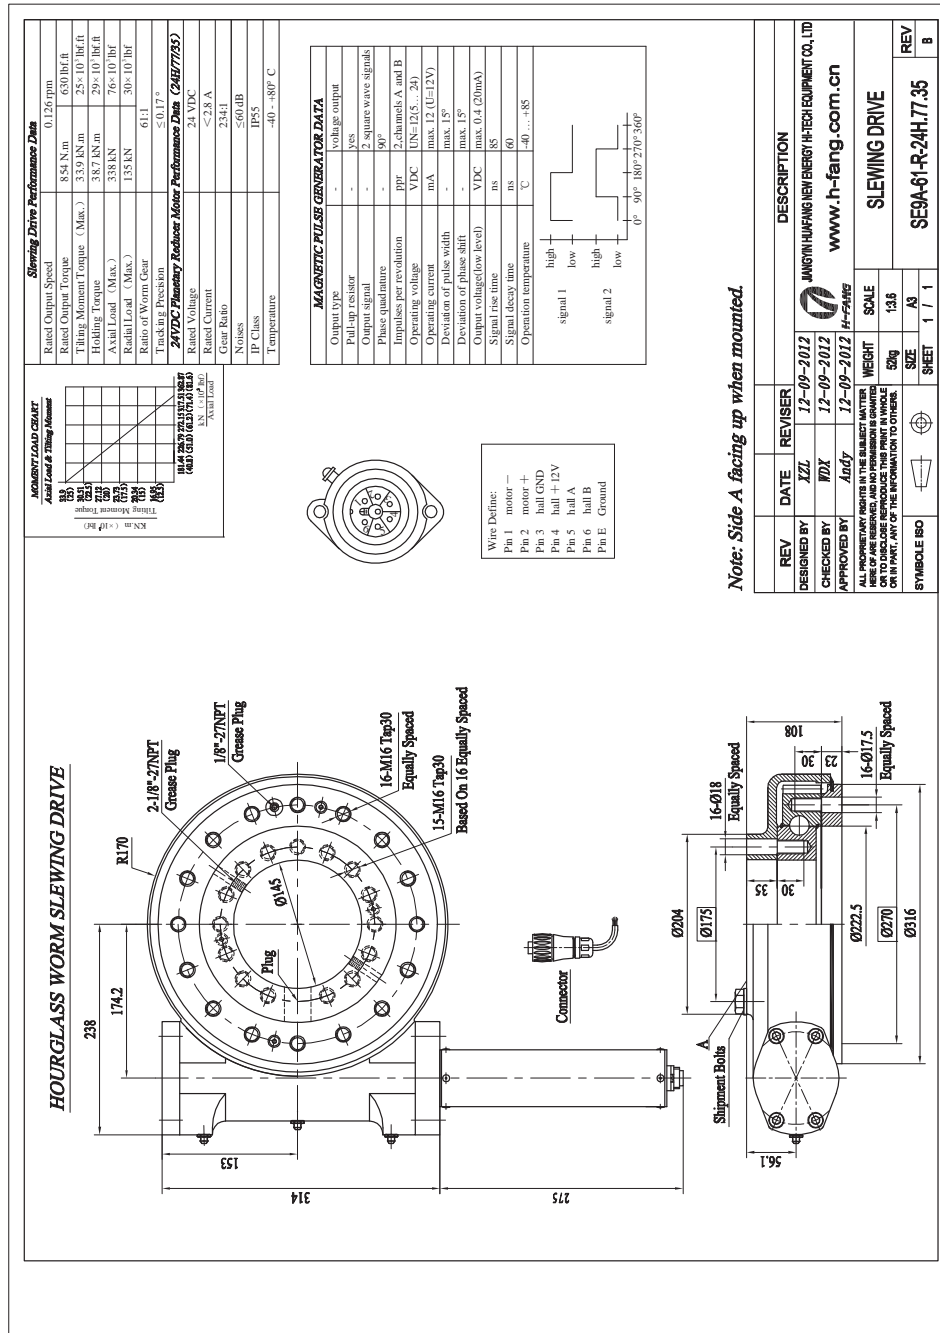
Datasheet of the selected SE9A slewing actuator mechanism and DC motor assembly (Fang, 2013).
